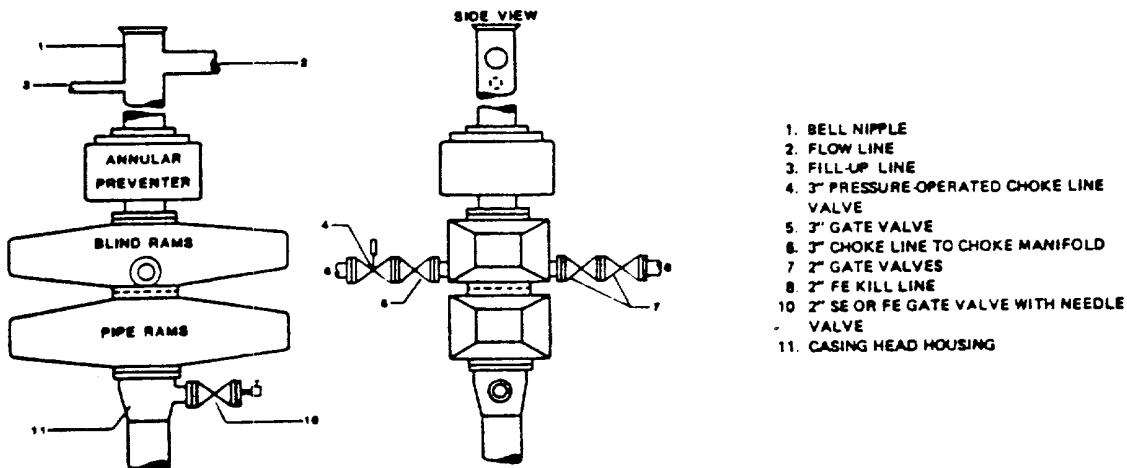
Standard Hydraulic Blowout Preventer Assembly (3 M Working Pressure) Alternative 2 (without Drilling Spool)
